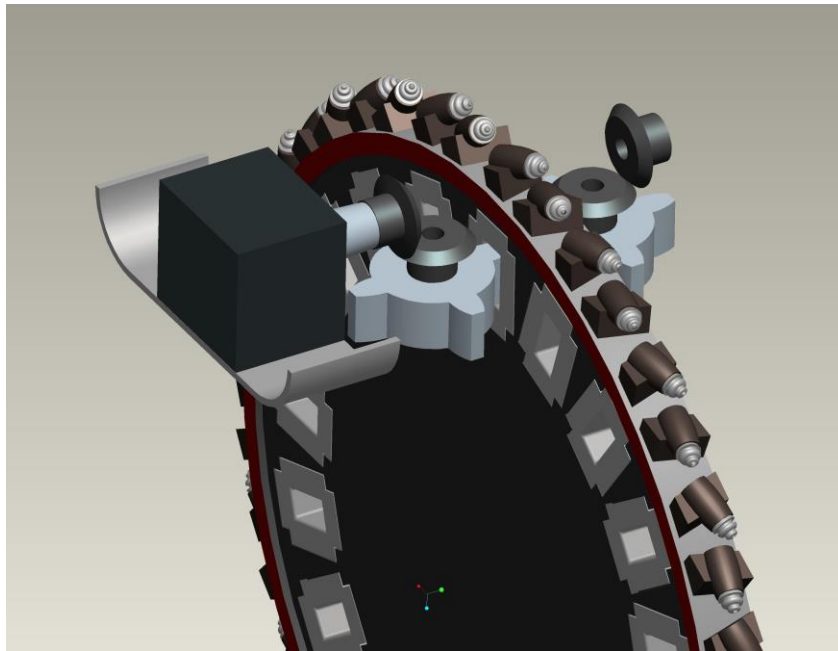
The alternative design for the new gear mesh. Use of miter gears to drive the new pinion gears in the new design of the ring gear.
